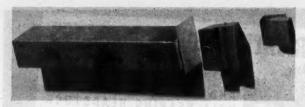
Offset Carboloy-Tipped Tool Disassembled. Showing Parts
